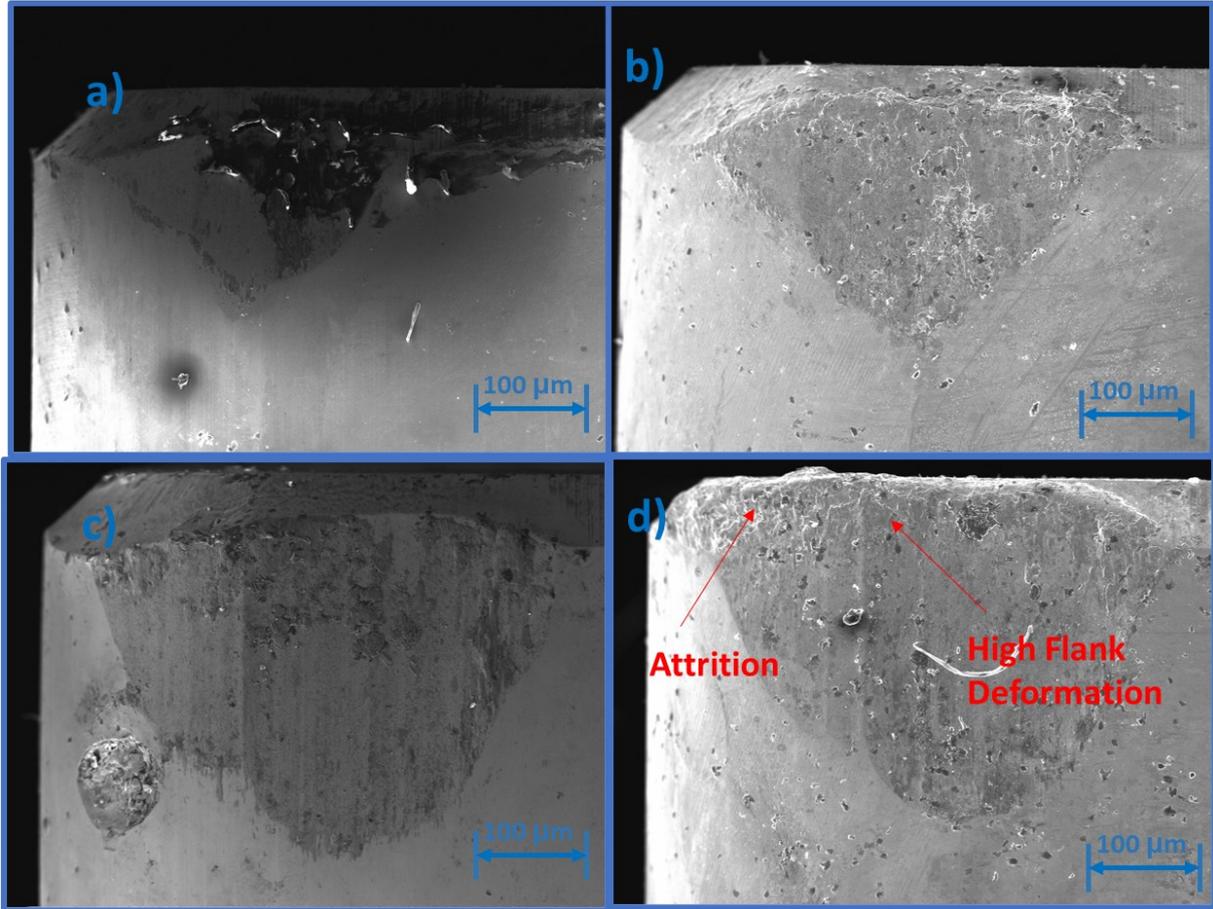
Scanning electron microscopy of the primary clearance surfaces of the tools. a) internally cooled tool $V_c = 80$ m/min; b) Common insert (Dry) = 80 m/min; c) internally cooled tool $V_c = 125$ m/min; d) Common insert (Dry) = 125 m/min.
